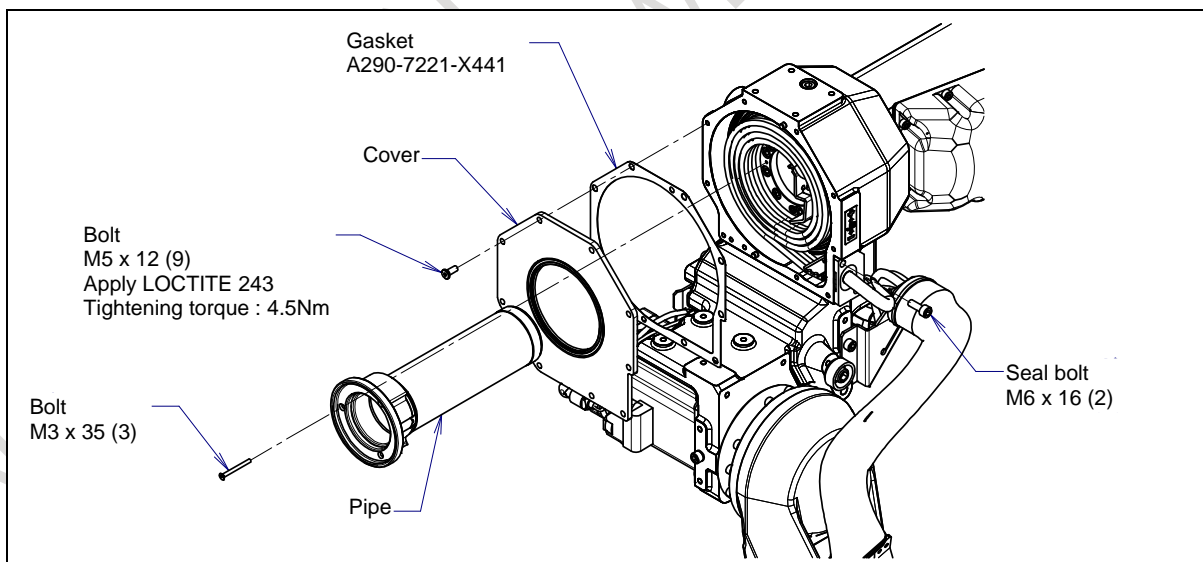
(d) Replacing cable kit (J3 casing part 1)
